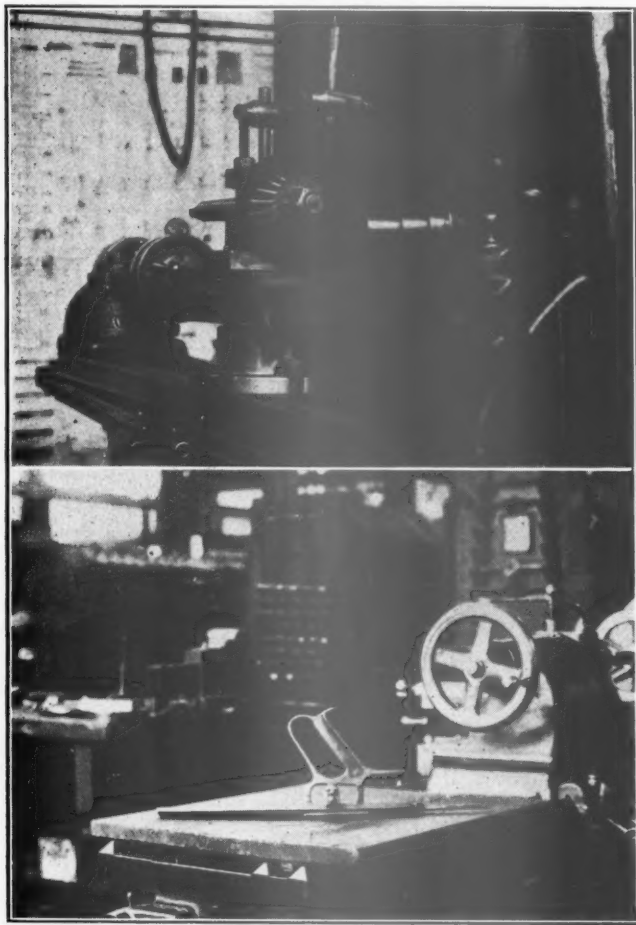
Top—Fixture for grinding ball-seat end mills; Bottom—A device for holding a flat file
